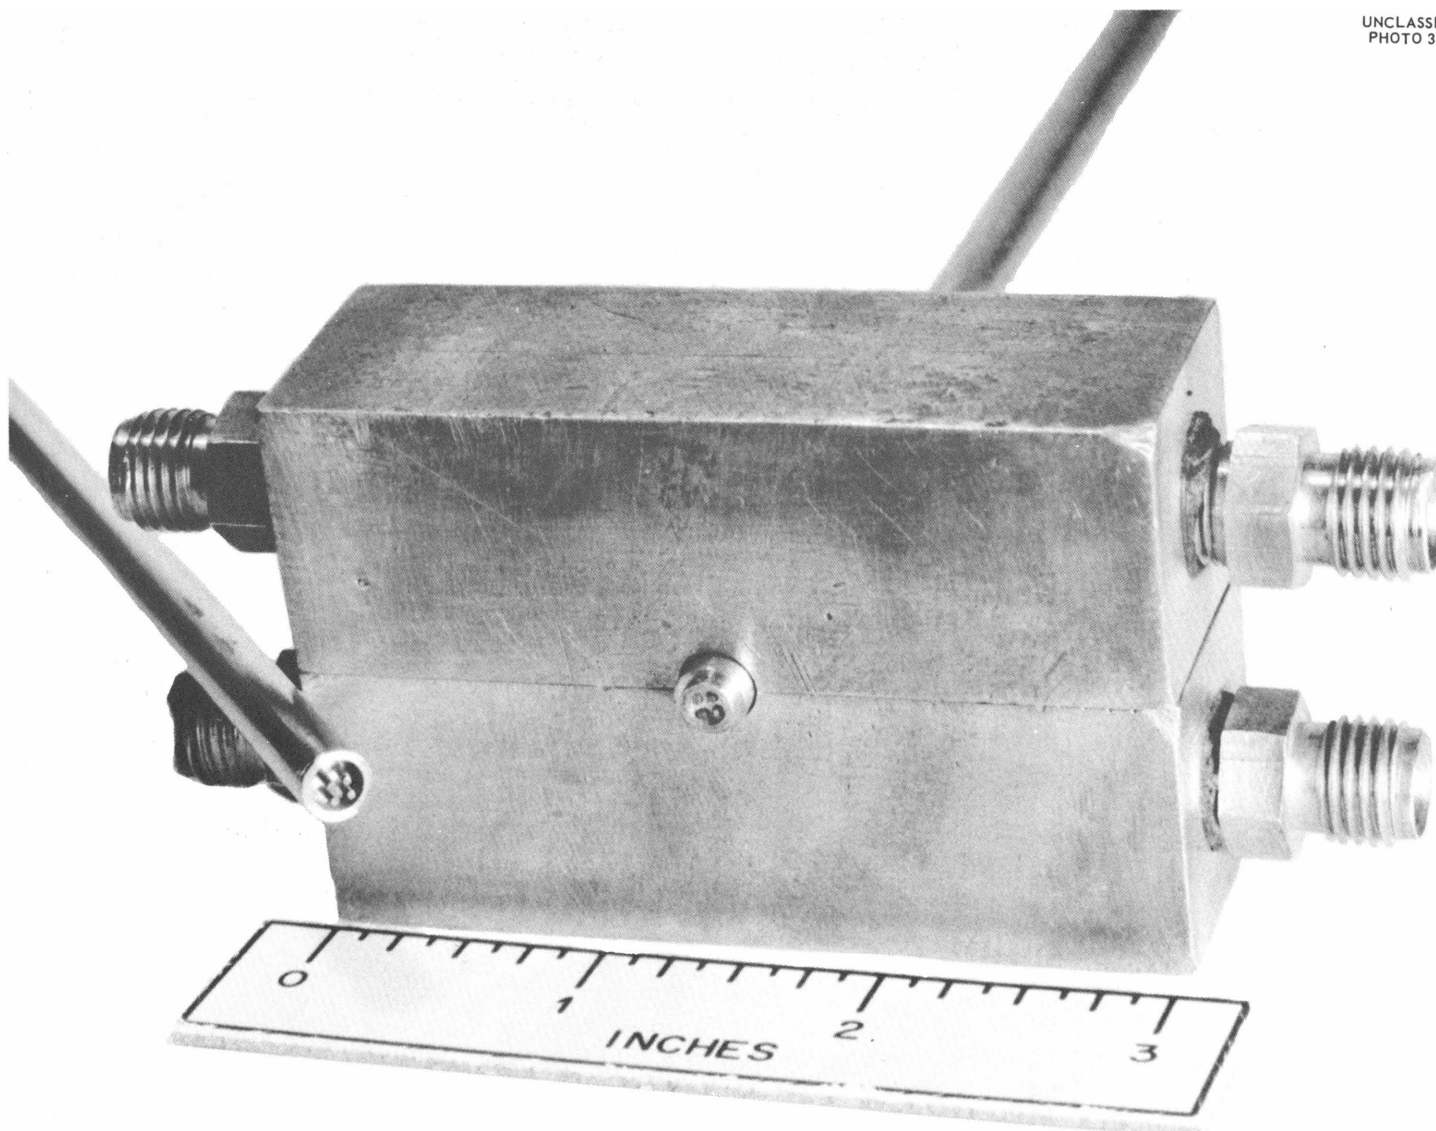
Setup for the Heliarc Closure Weld on 0.250-in.-O.D. Inconel-Sheathed Thermocouple Material Shown Mounted in a Water-Cooled Copper Chill Block with Inconel Filler Tip. (Also shown is the end of a piece of the material prepared for the welding operation.)
